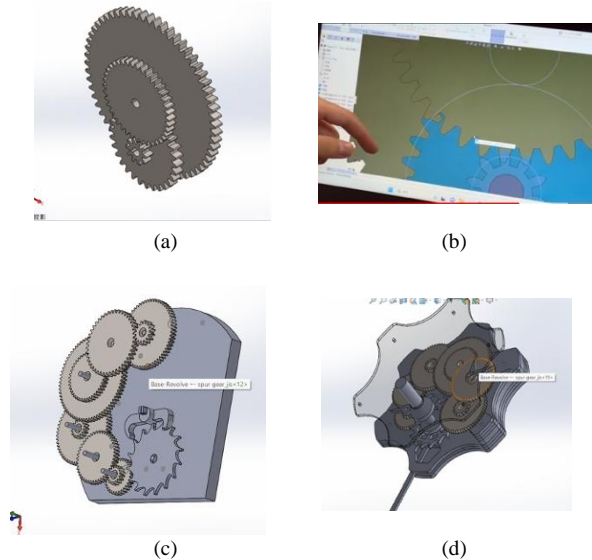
Process of creating the mechanical material (a). Gear design in SolidWorks (b). Simulation of gear meshing (c). Assembly (d). Completion of assembly
